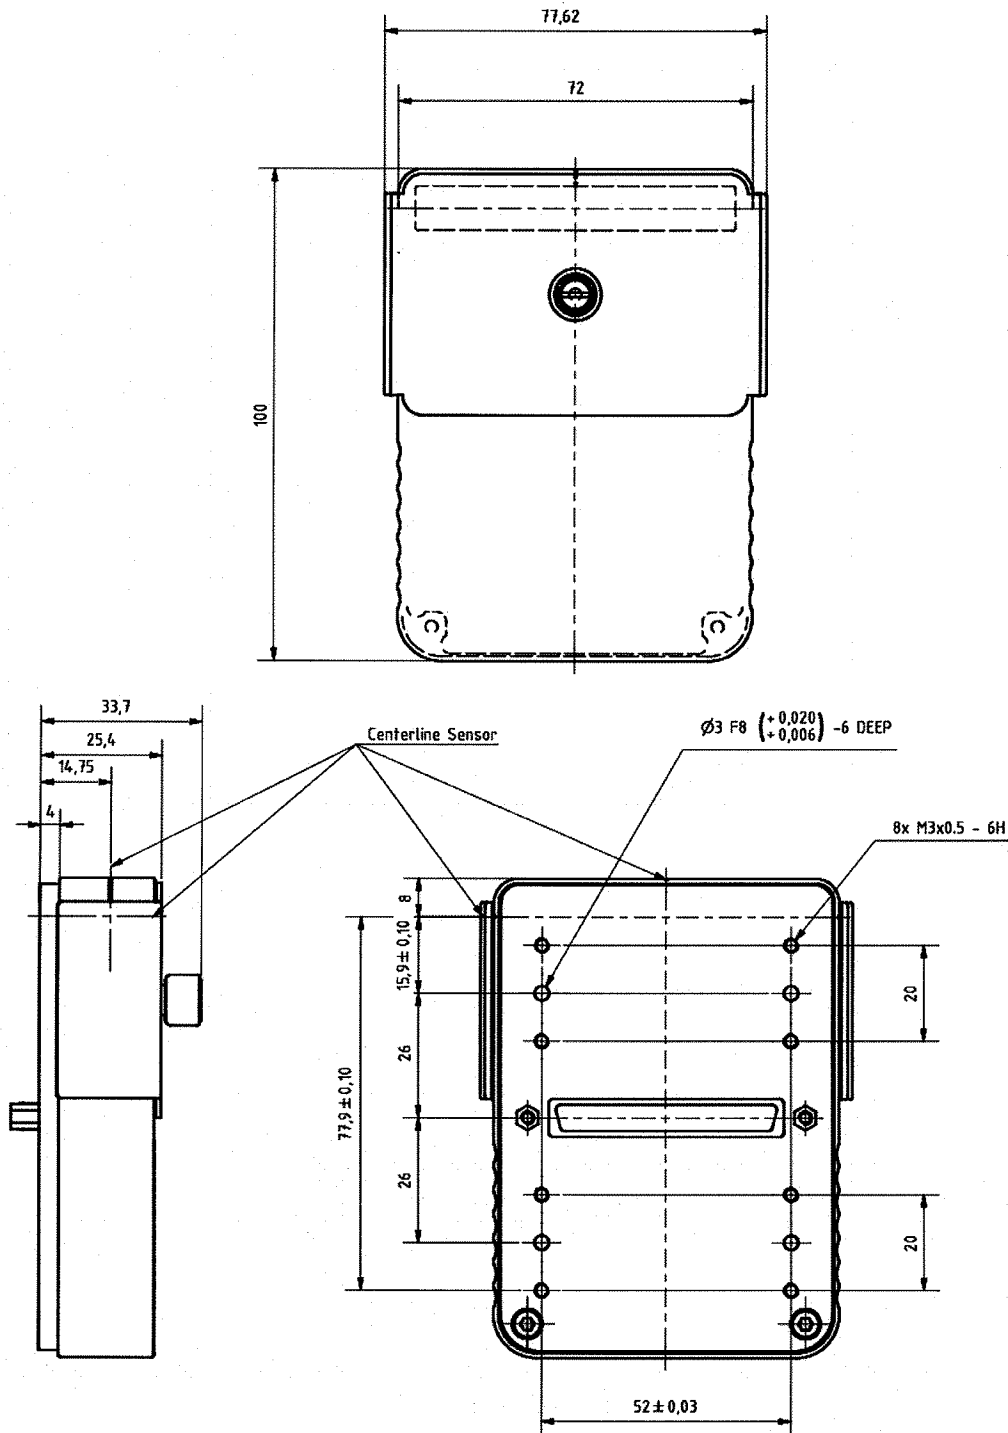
Dimensions of detector housing and position of the tap holes for mounting the system.
